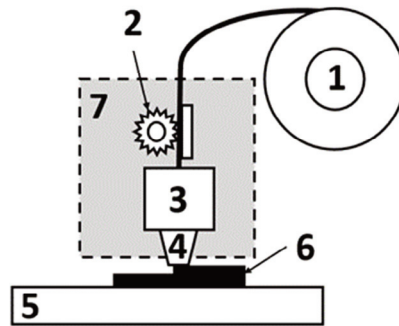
Scheme of 3D printing in the FDM method: 1 – filament spool, 2 – filament dispensing gear, 3 – heating block, 4 – nozzle (hot end), 5 – print bed, 6 – printed element, 7 – extruder (gray).
